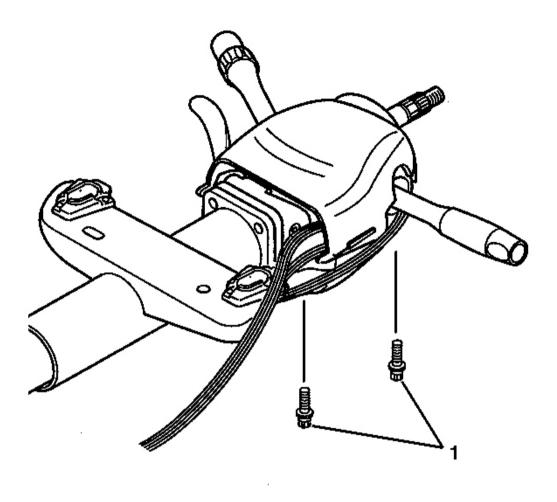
TORX(R) Head Screws & Lower Trim Cover Courtesy of GENERAL MOTORS CORP.
